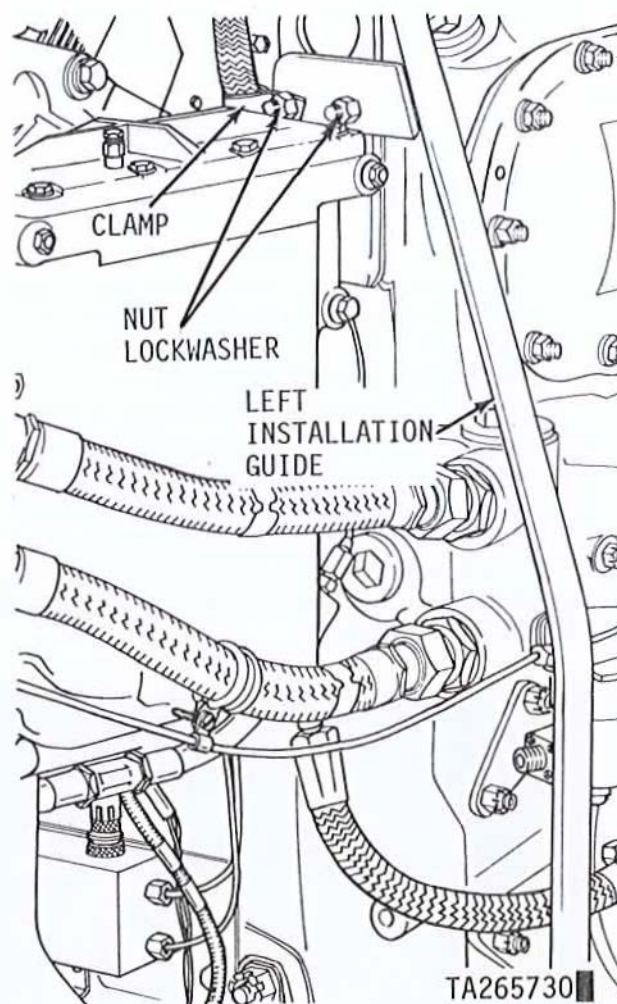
Installing left installation guide, model AVDS-1790-2C and AVDS-1790-2D engines.
